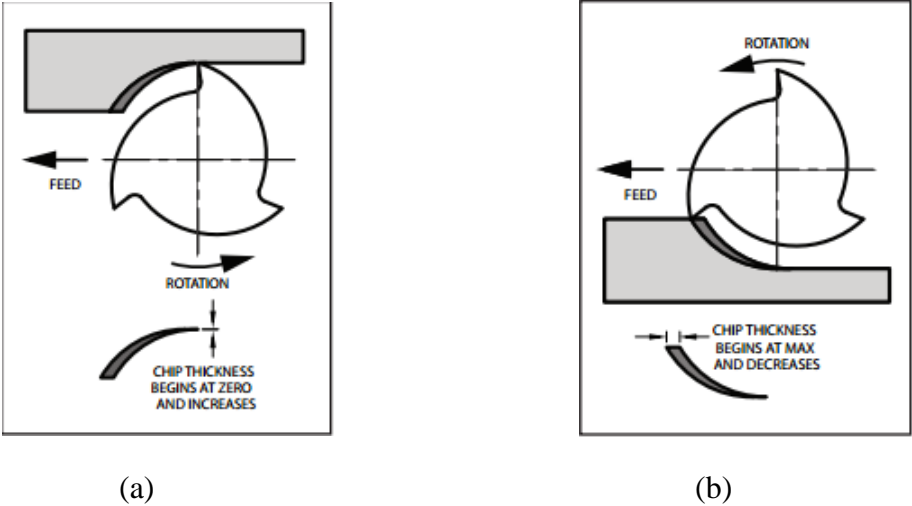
a) Conventional Milling, b) Climb milling [52]
